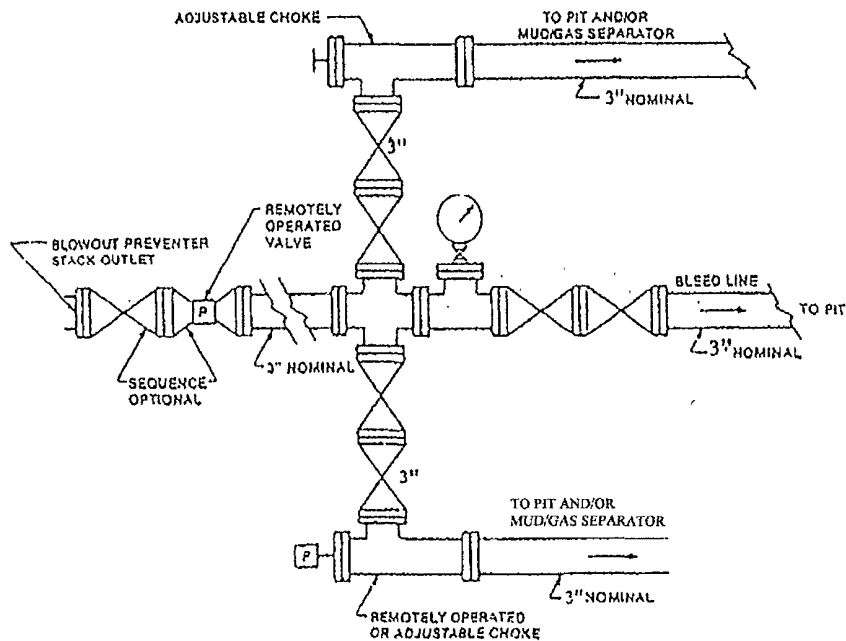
Typical choke manifold assembly for 5M rated working pressure service - surface installation
